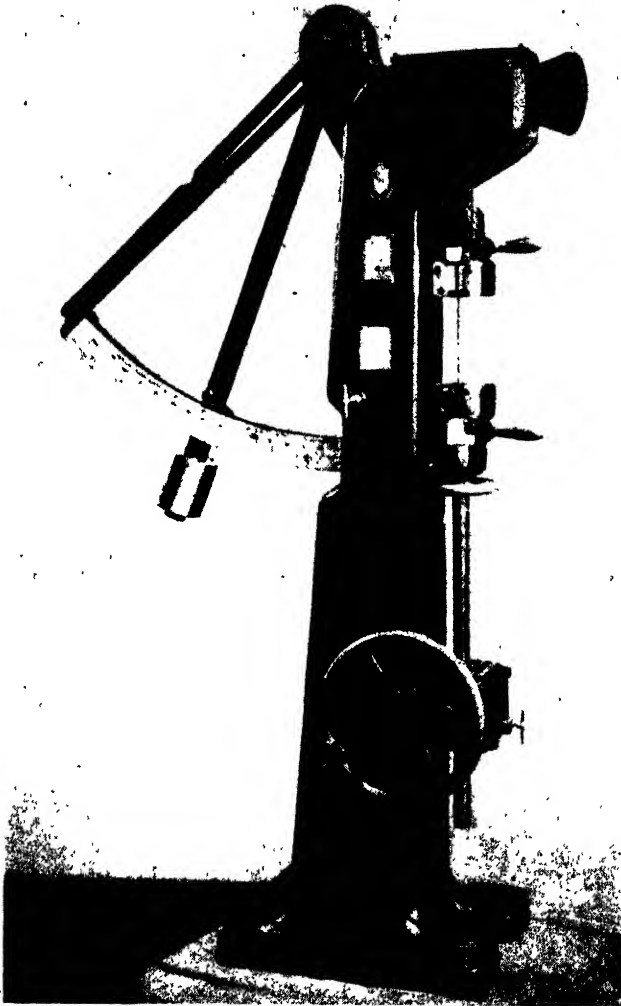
A SEMI-AUTOMATIC WIRE TENSILE TESTING MACHINE
